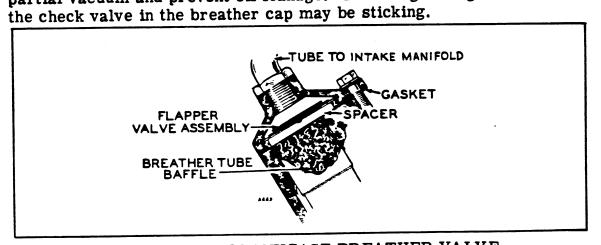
SERVICING CRANKCASE BREATHER VALVE
